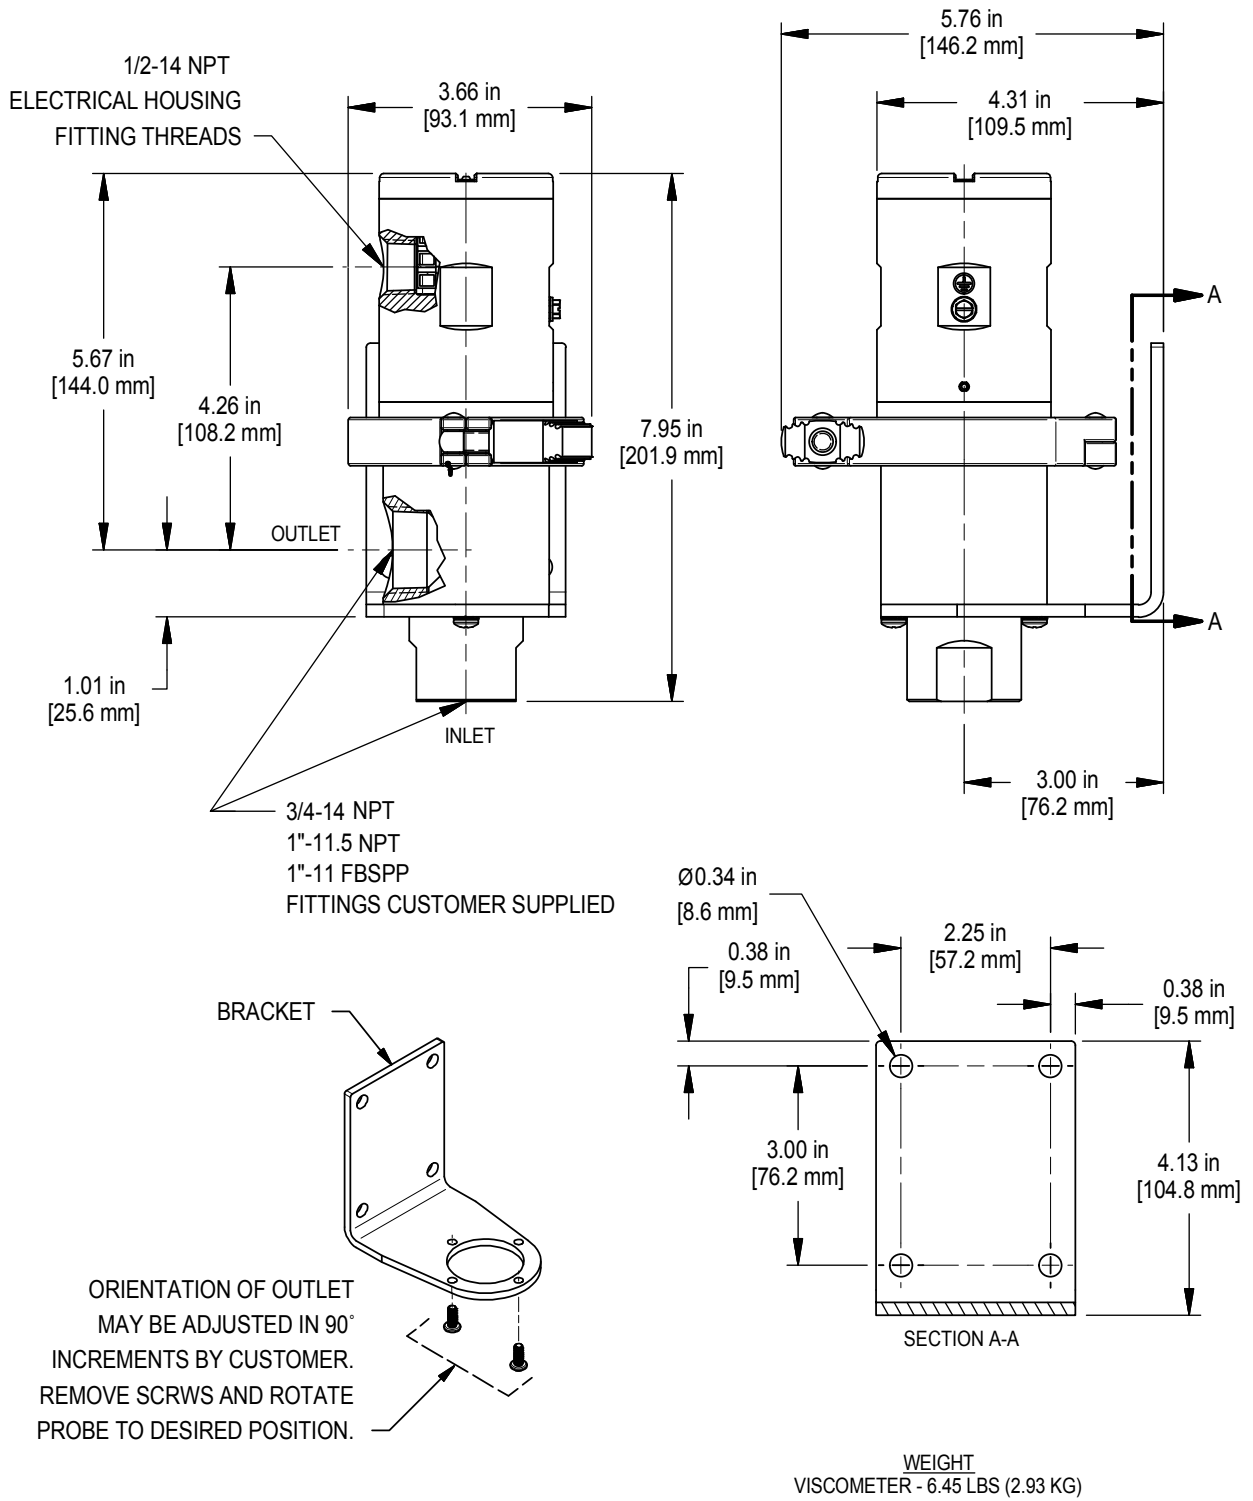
FAST-10X (Female Chamber) Bracket Mounting and Clearance
